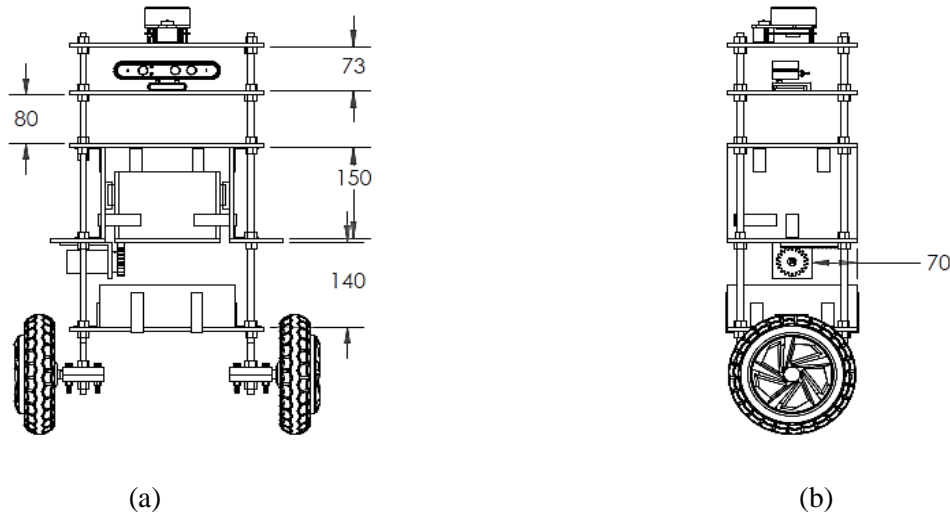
Full assembly schematic diagram; a) Front view, b) Side view
